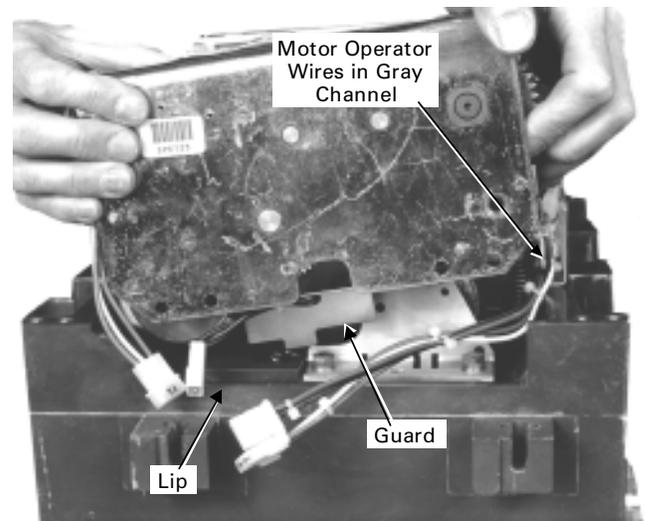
Rotating the Motor Operator Mechanism so that the guard clears the lip on the side of the circuit breaker.
